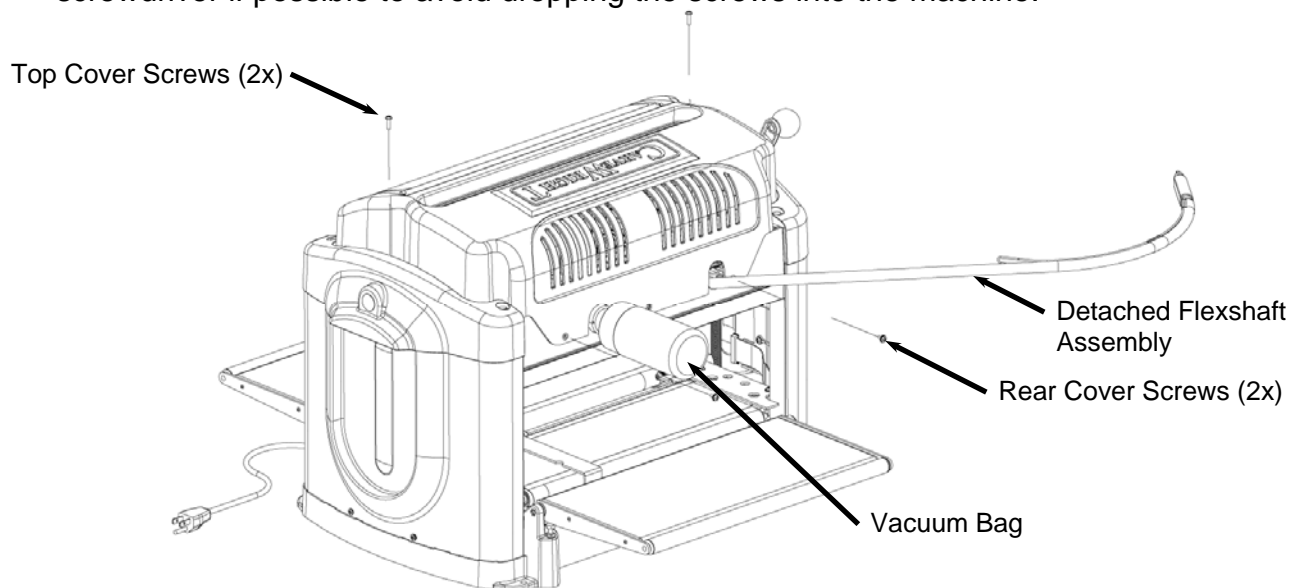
EXPLODED VIEW OF THE COVER SCREWS
